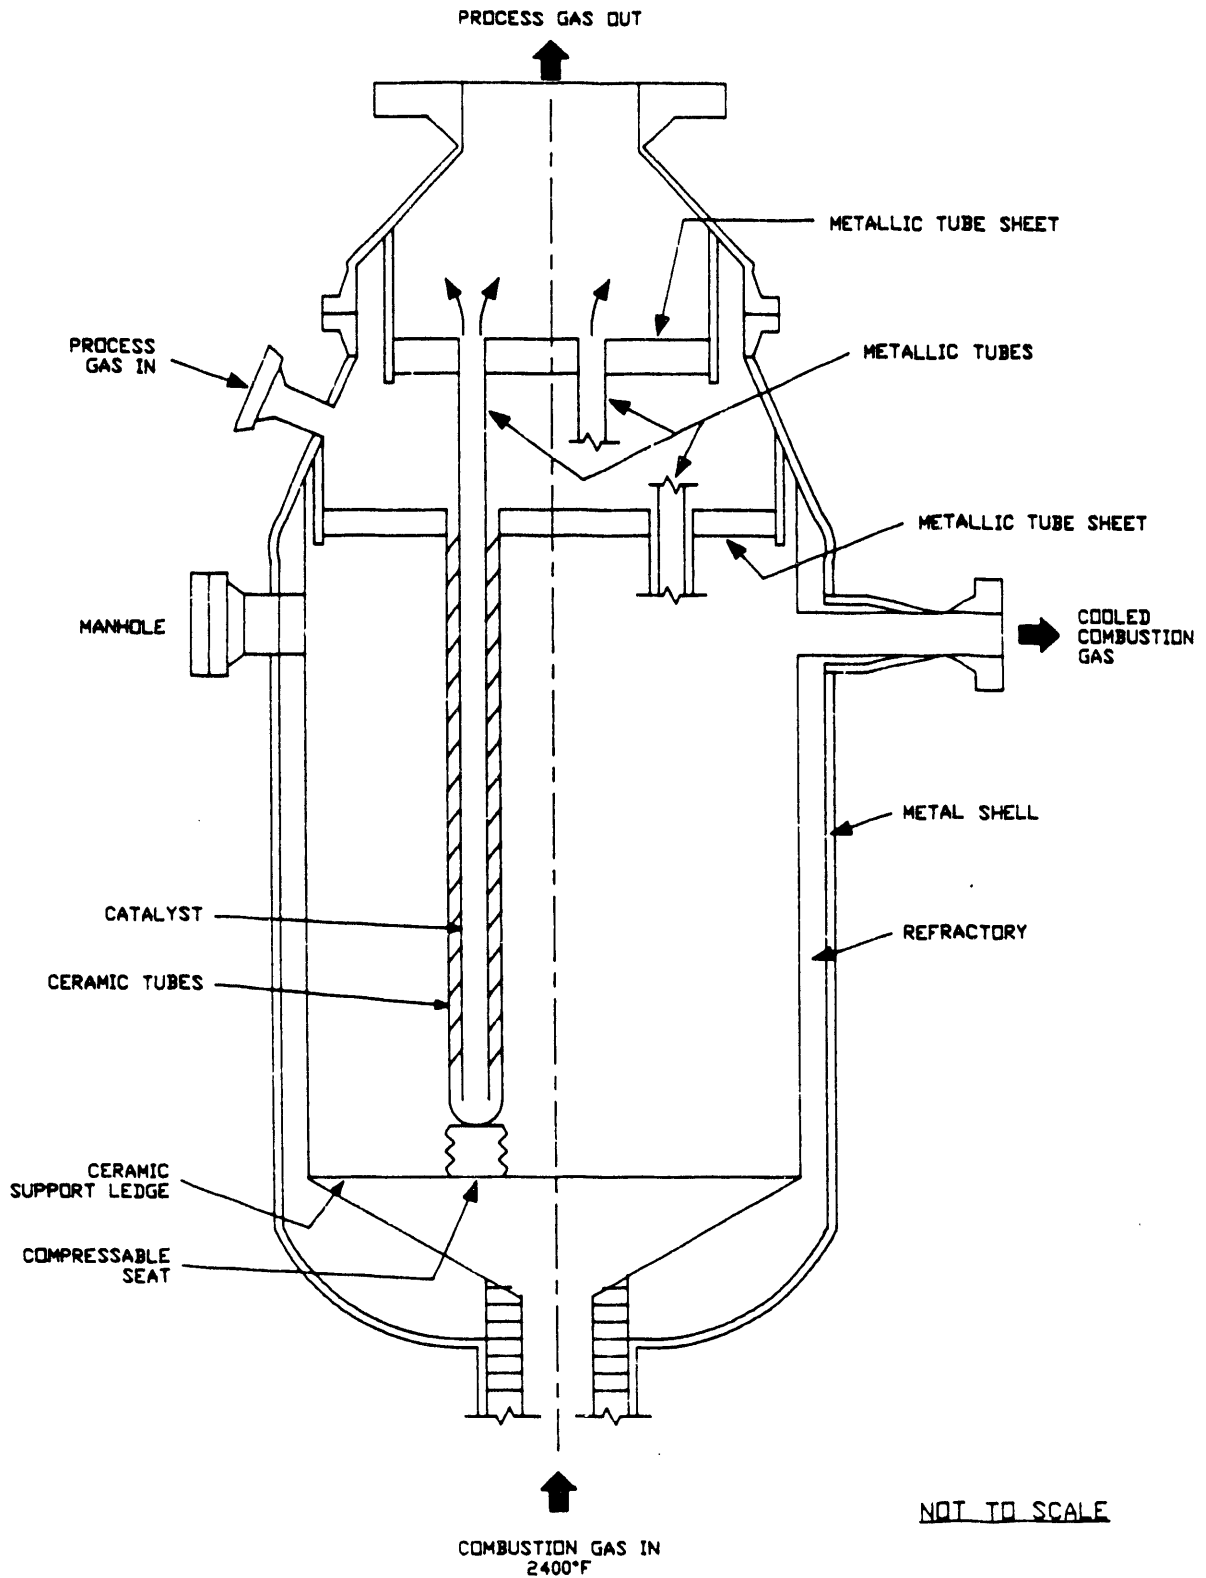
Schematic design of HiPHES tube within a tube steam reformer.
